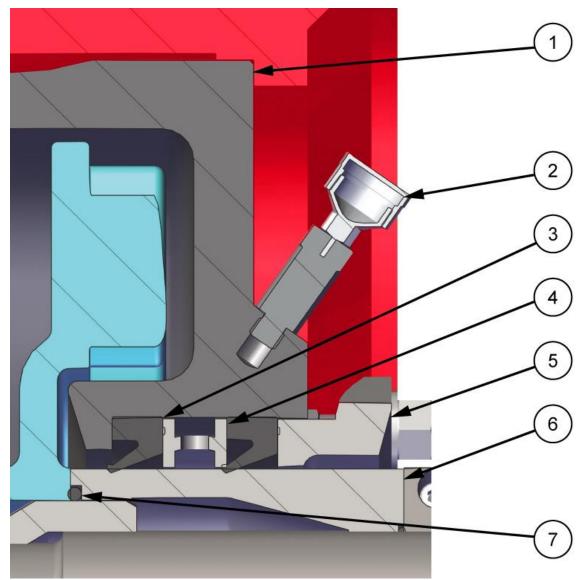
Fitting of Expeller Ring, Shaft Seals, Gland Studs, Gland, Shaft Sleeve, Shaft Sleeve O-Ring and Expeller.
